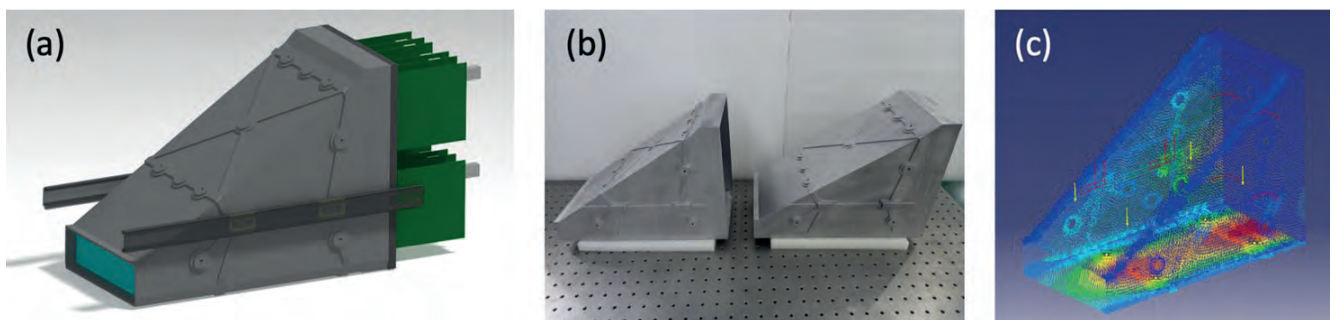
CAD view of the mechanical assembly of the PANDA Barrel DIRC readout module (a), photo of the first two prototype readout box covers at GSI (b), and finite elements (FEM) calculation of the deformation caused by loading the prism cover with the fused silica prism (c).
